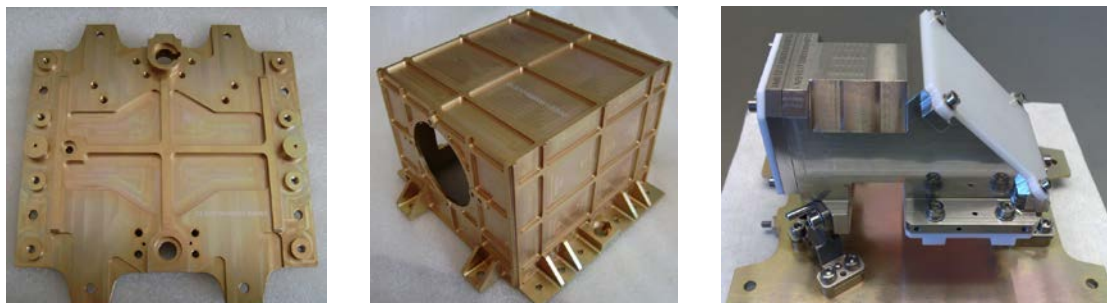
CLS OB Optical Assembly, Baseplate, and Housing
